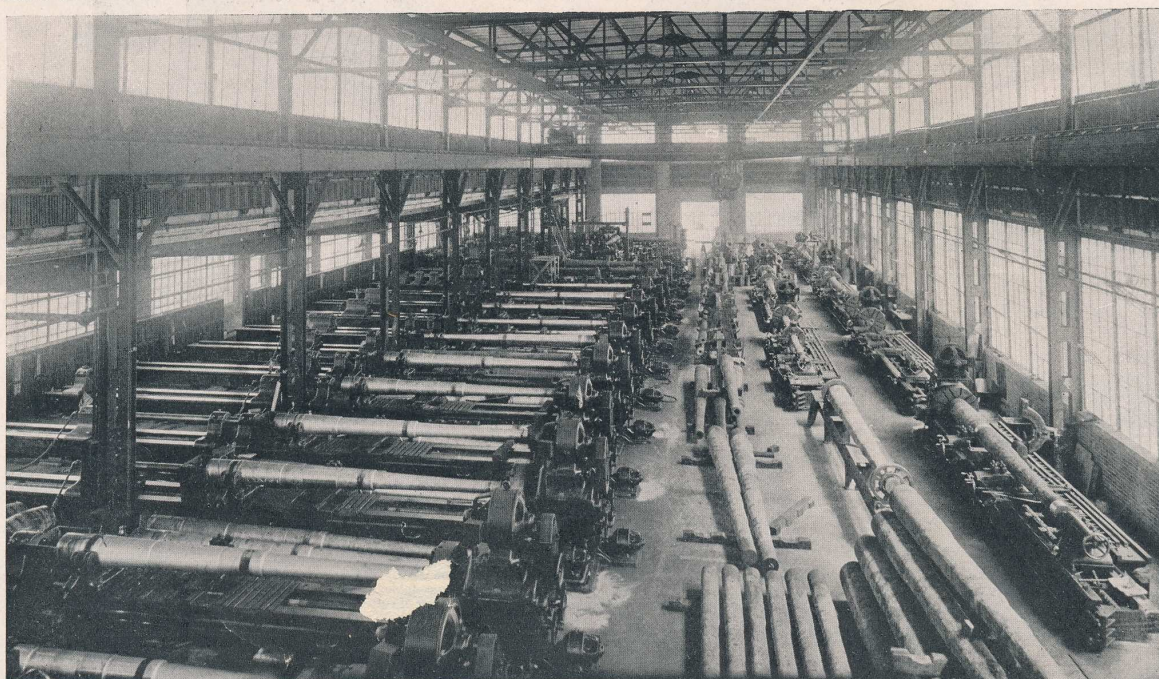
A MODERN GUN PLANT COMPLETELY EQUIPPED WITH BETTS-BRIDGEFORD HEAVY DUTY TOOLS
